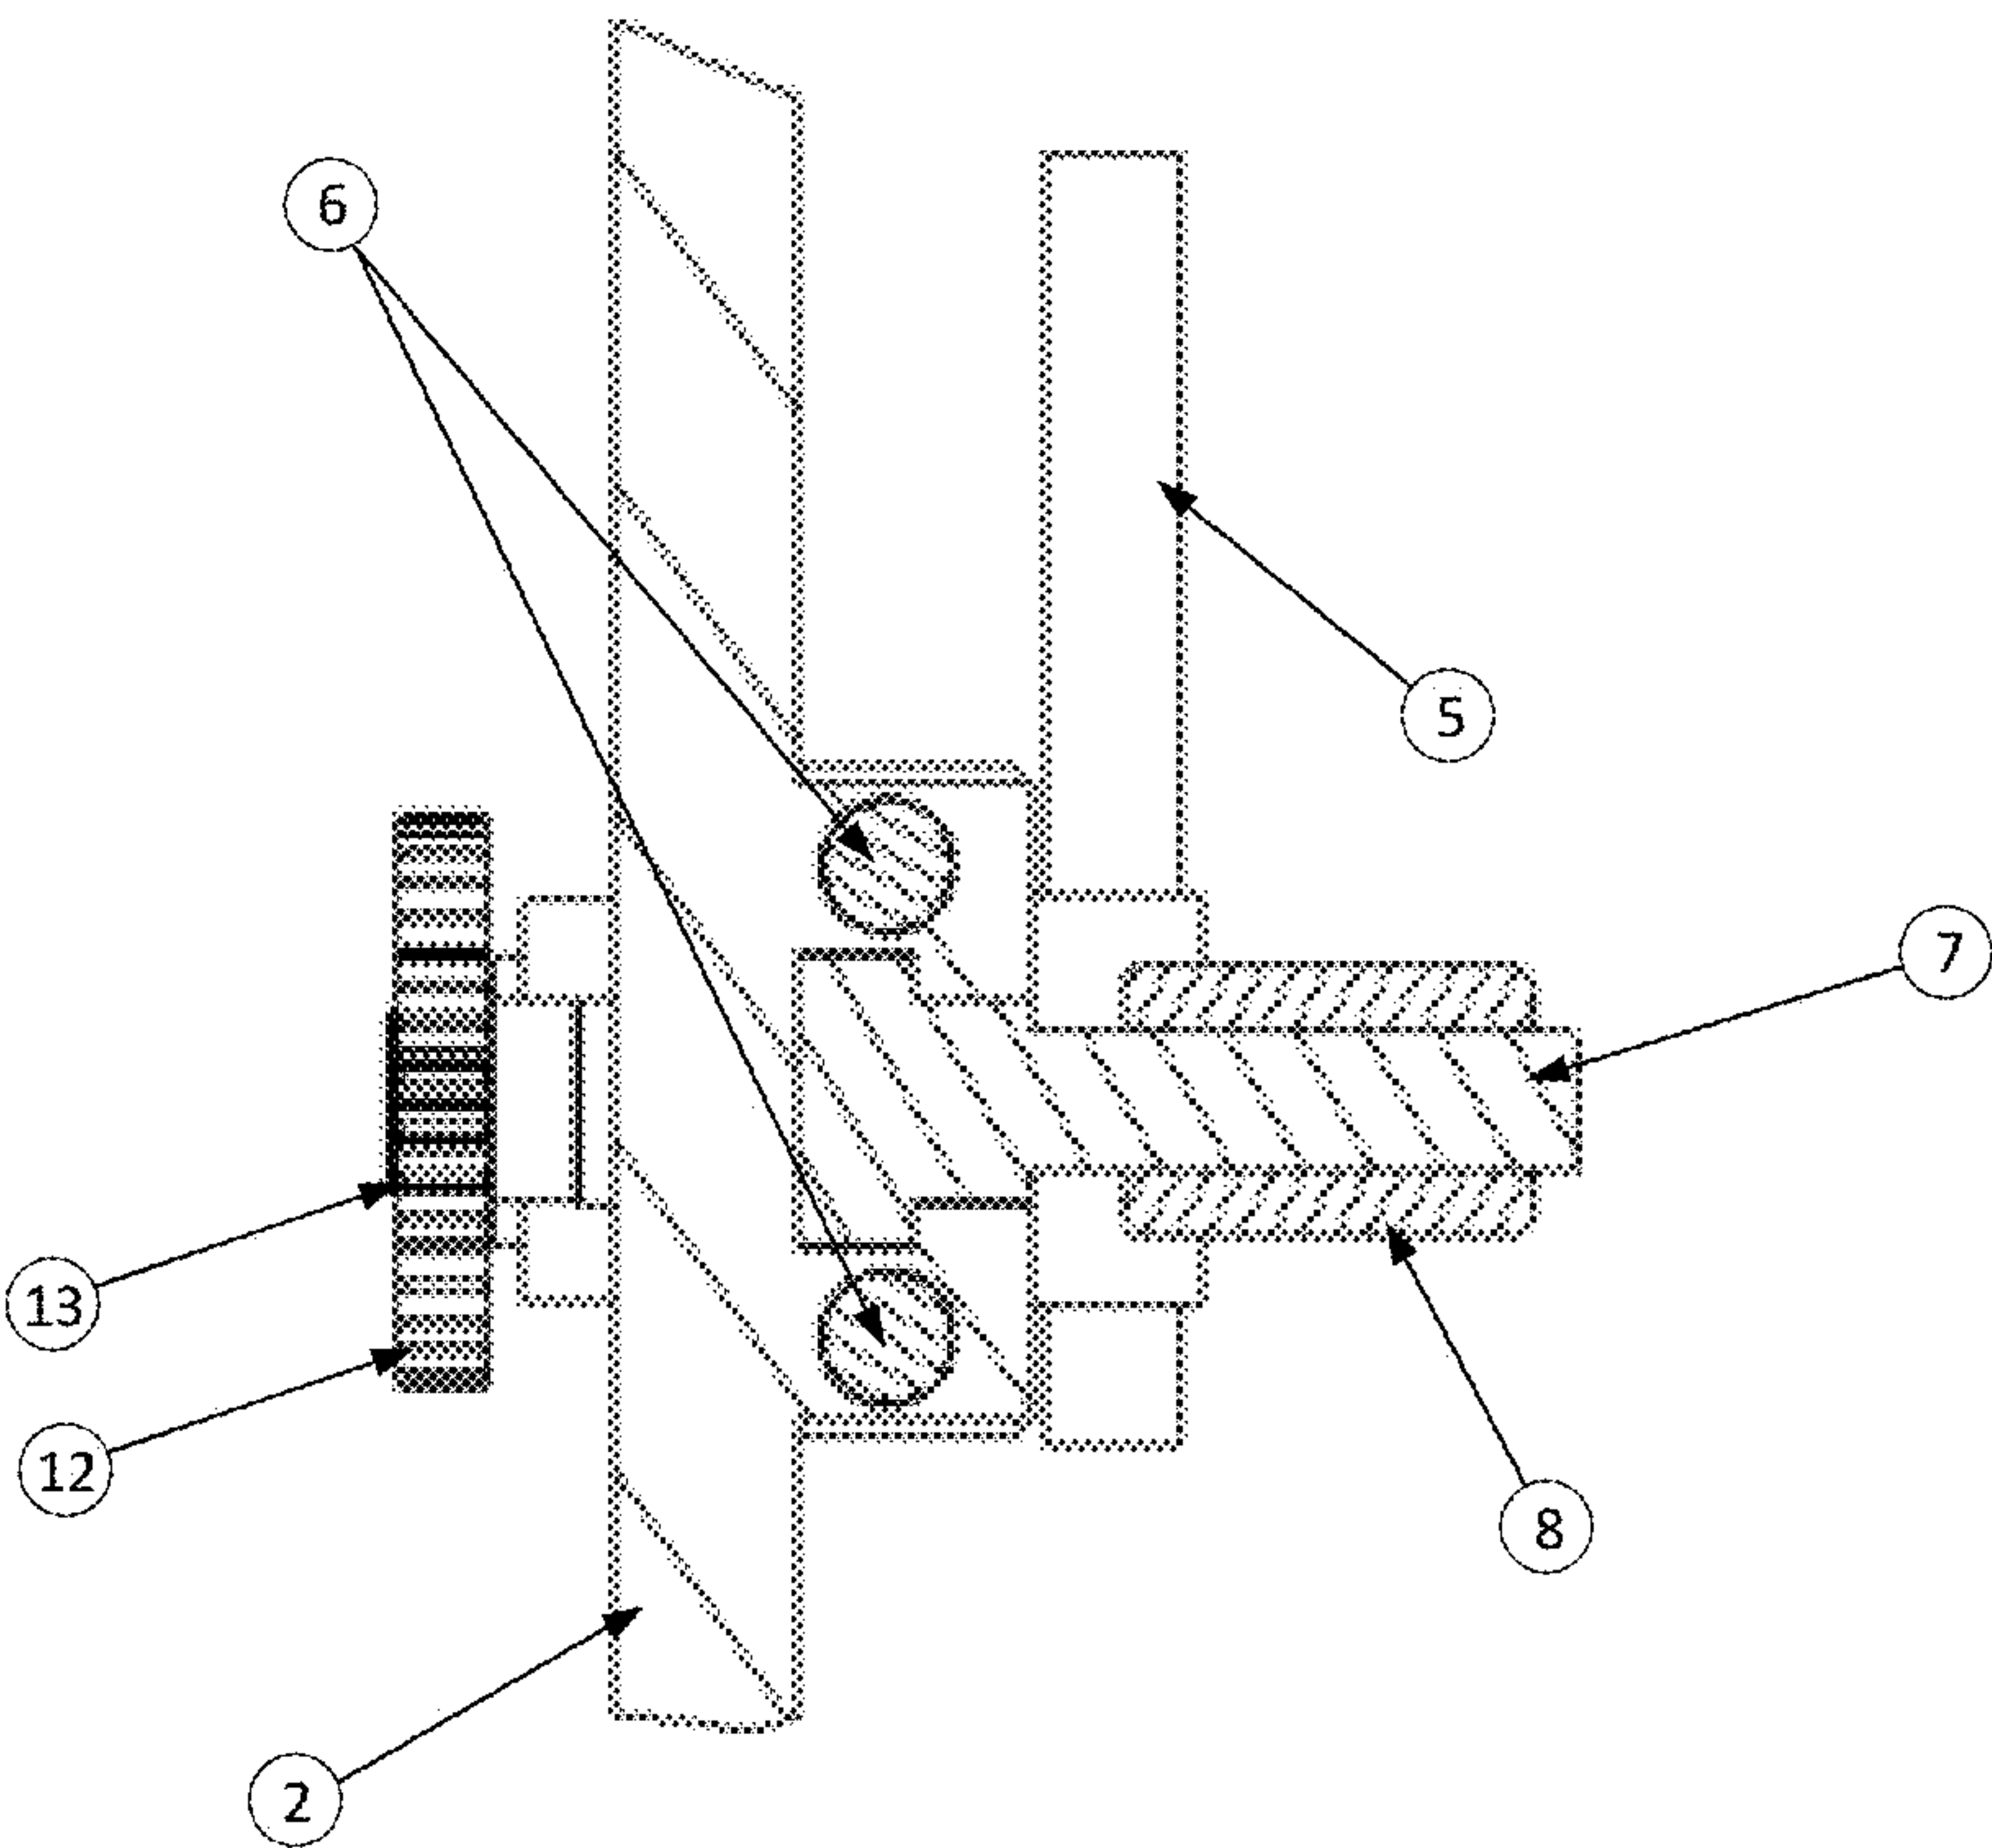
Cross Section A-2 - Tension Side Follower and Idler Roller
